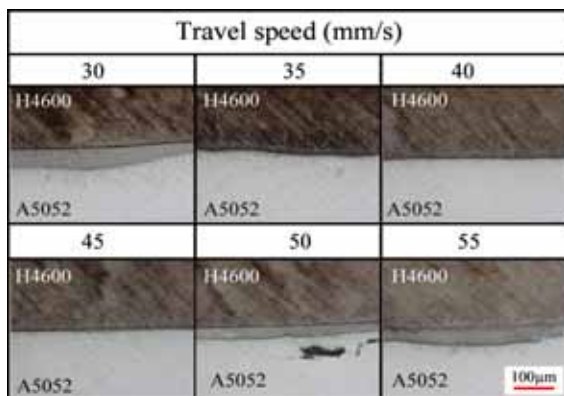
Photos of joint interfaces of laser roll welding
